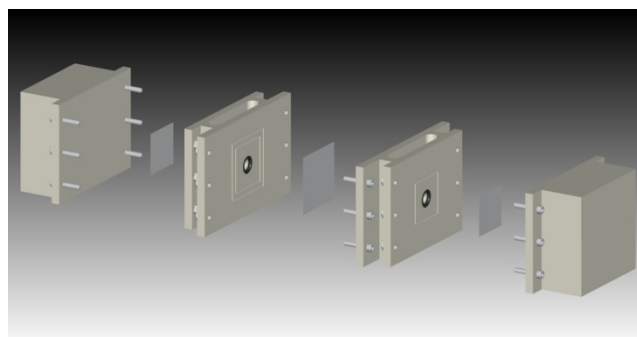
Exploded drawing of a cell for electroplating both sides of a substrate material simultaneously.
